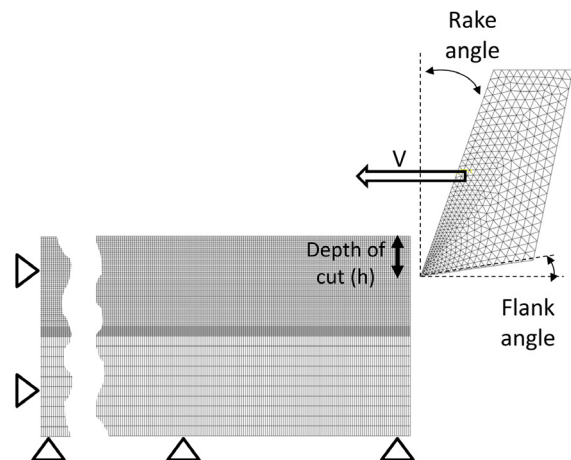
An example of tool and workpiece model with positive tool rake angle
